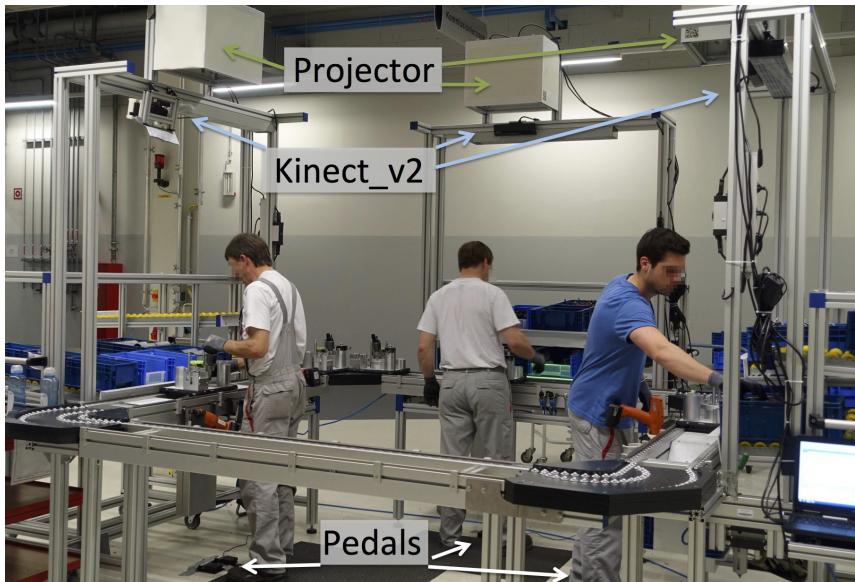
We installed our assistive system for providing in-situ assembly instructions using the assembly cell setup. Each workplace is equipped with a Kinect_v2 and a projector. The work steps involving assembly parts that are too small to detect with the camera can be advanced manually using foot pedals.
